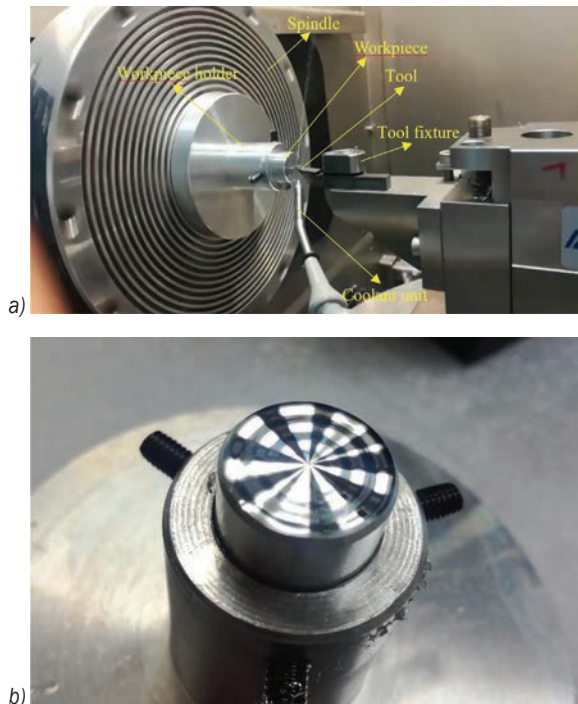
The machining experiment; a) machine tool system, and b) the machined complex sinusoidal mesh surface sample
